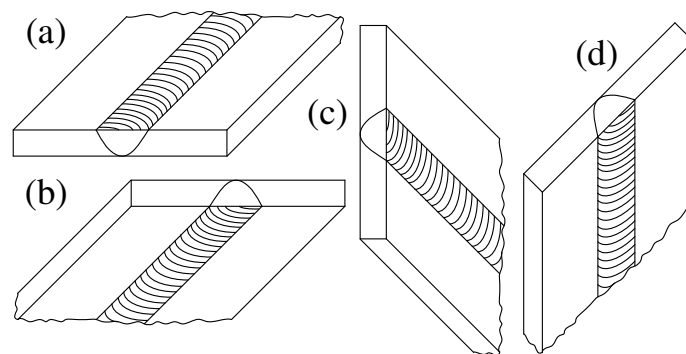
Welding positions: (a) flat, (b) overhead, (c) horizontal, (d) vertical positions.
